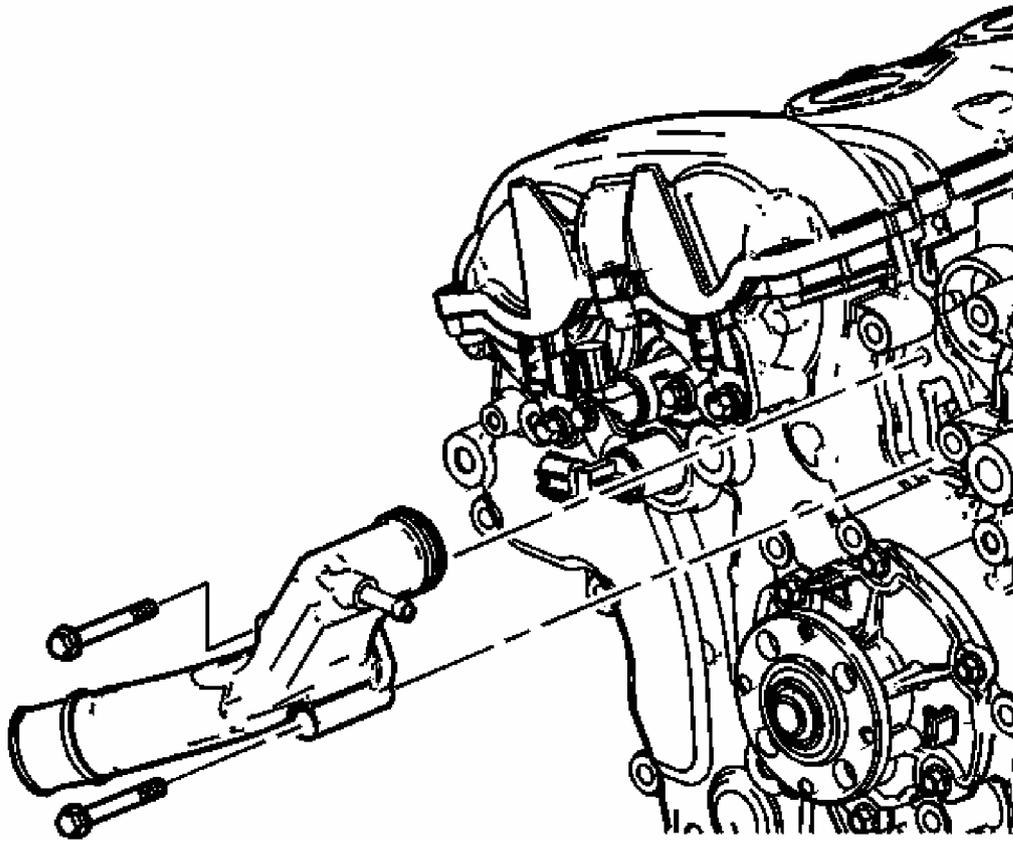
View Of Heater Inlet/Outlet Pipe Assembly
